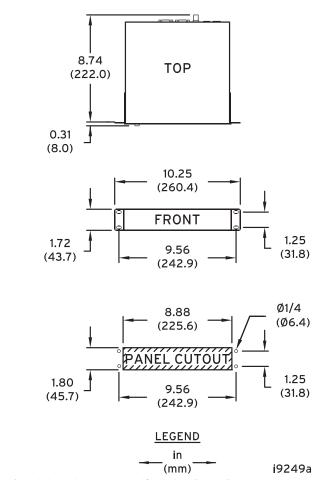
SEL-3530-4 Horizontal Rack-Mount (Half Rack) Dimensions
